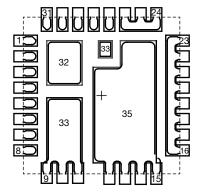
Multi - Phase VRPower Layout Bottom View
